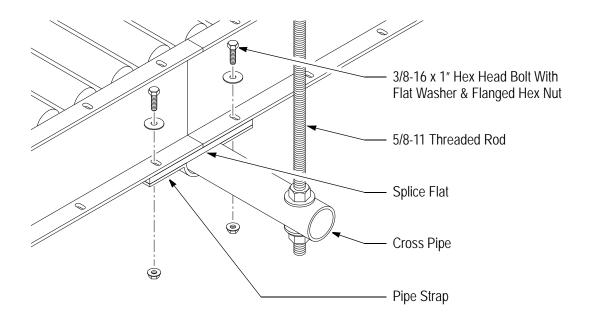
Installing a Ceiling Hanger Centered on a Section Joint
